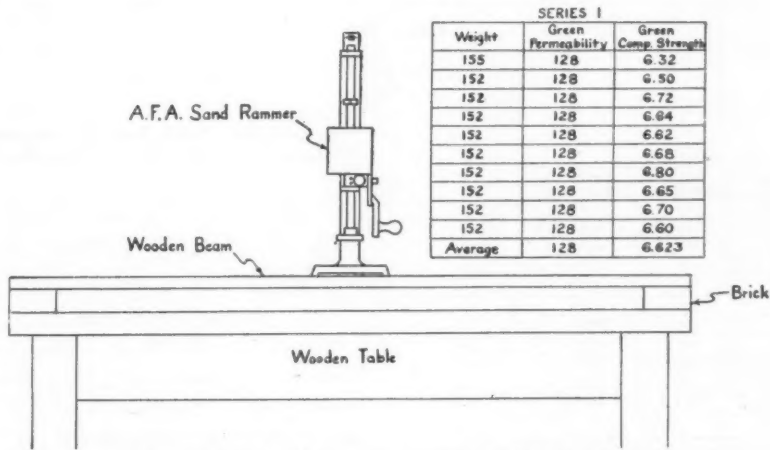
A.F.A. Sand Rammer Mounted on Wooden Beam.
